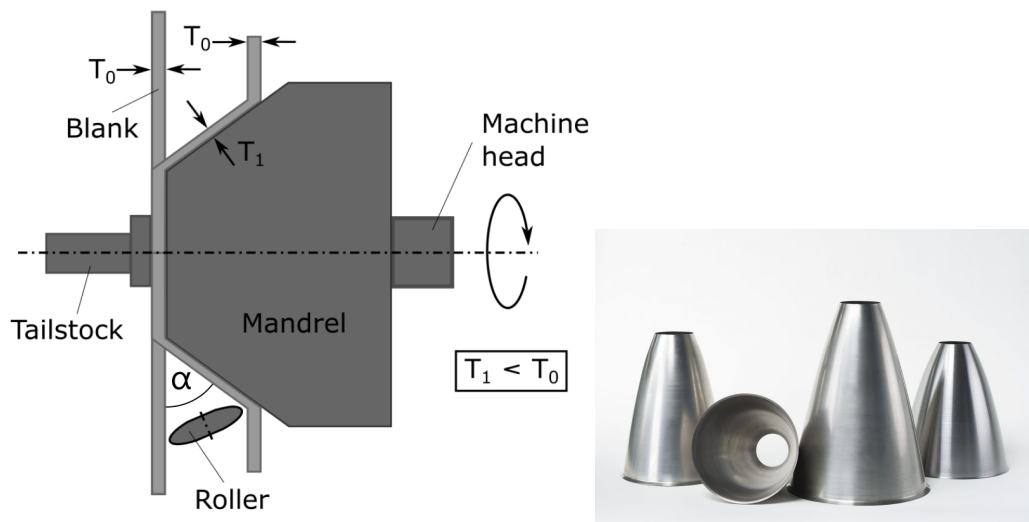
Shear forming machine schematic (left) and example parts (right).
